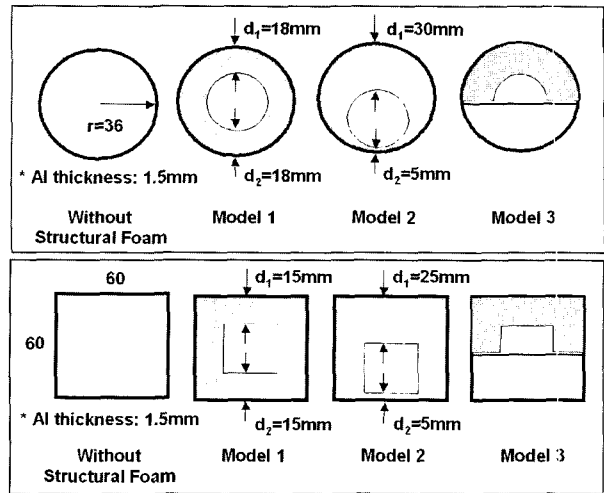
Cross-sectional profile design concepts of aluminum extrusion filled with structural foam.
